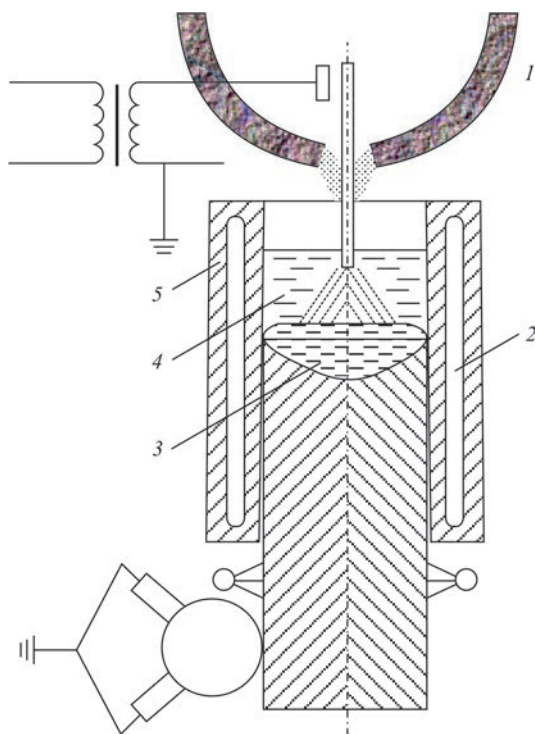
Scheme of CESR process: 1 — powder feeder; 2 — water cooling; 3 — liquid metal; 4 — slag pool; 5 — mould
